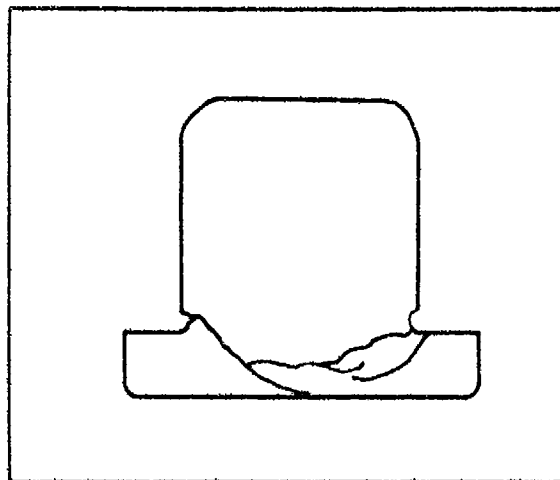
Sectional macrograph shows cracking in a main landing gear side strut bolt (220 ksi) plated with chromium. Failure after 13 hours of service on an airplane is probably induced by hydrogen.
